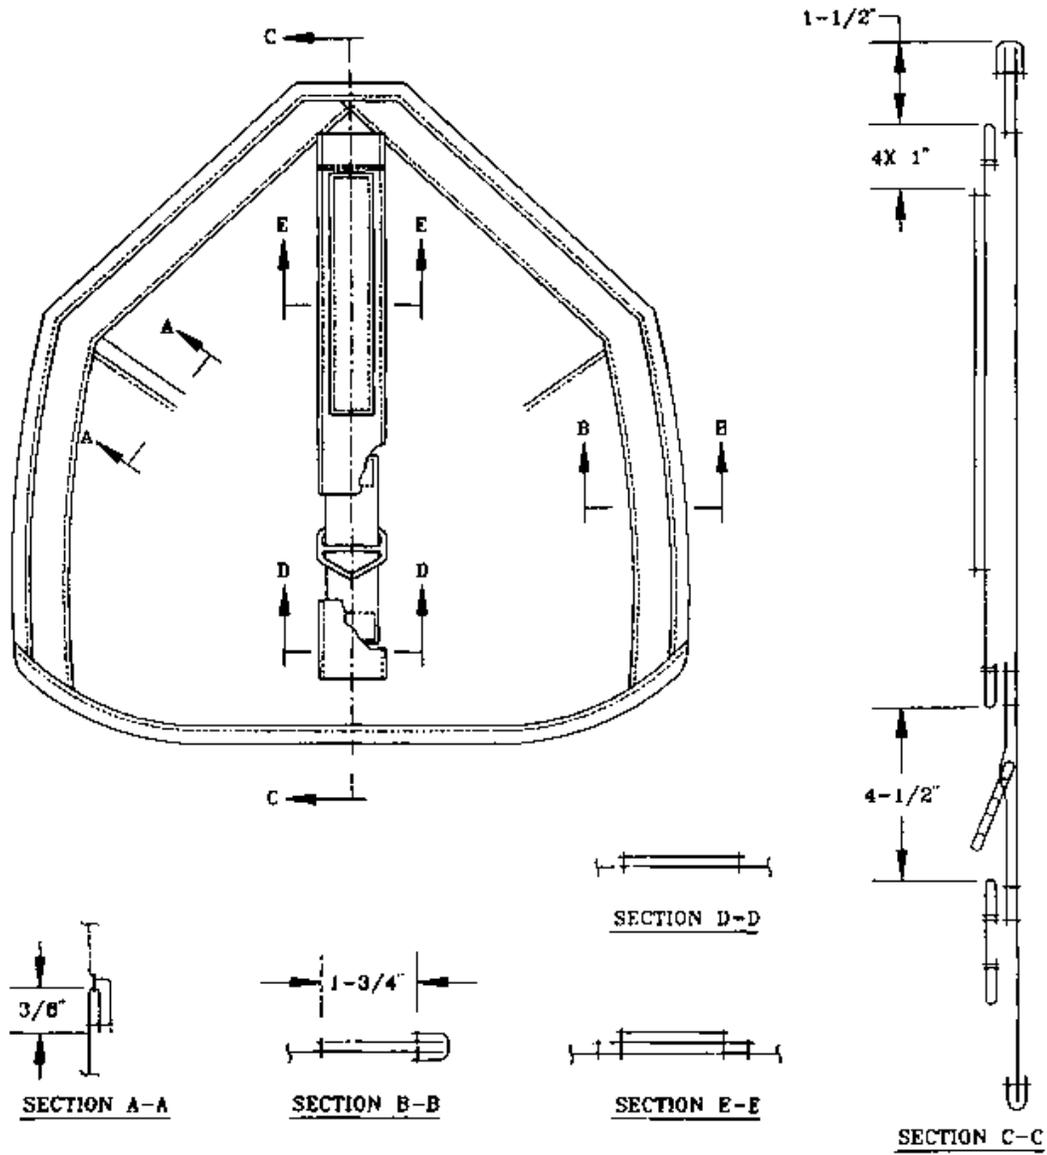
(CONTAINER SIDE MOUNTED) UPPER CAP ASSEMBLY (SHEET 2 OF 2)
